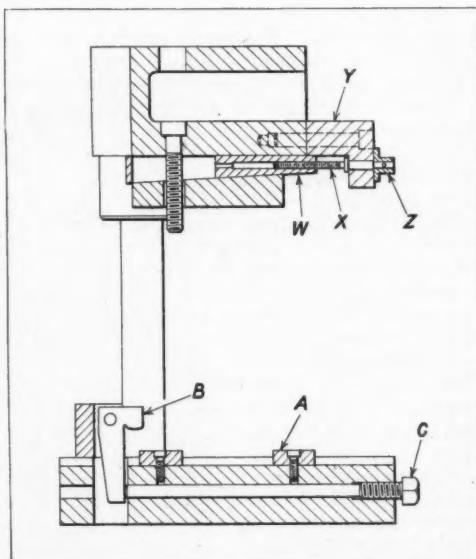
Sectional view showing the wedge adjustment for the upper assemblies of certain tool units, also the rear clamping arrangement for lower tool assemblies
